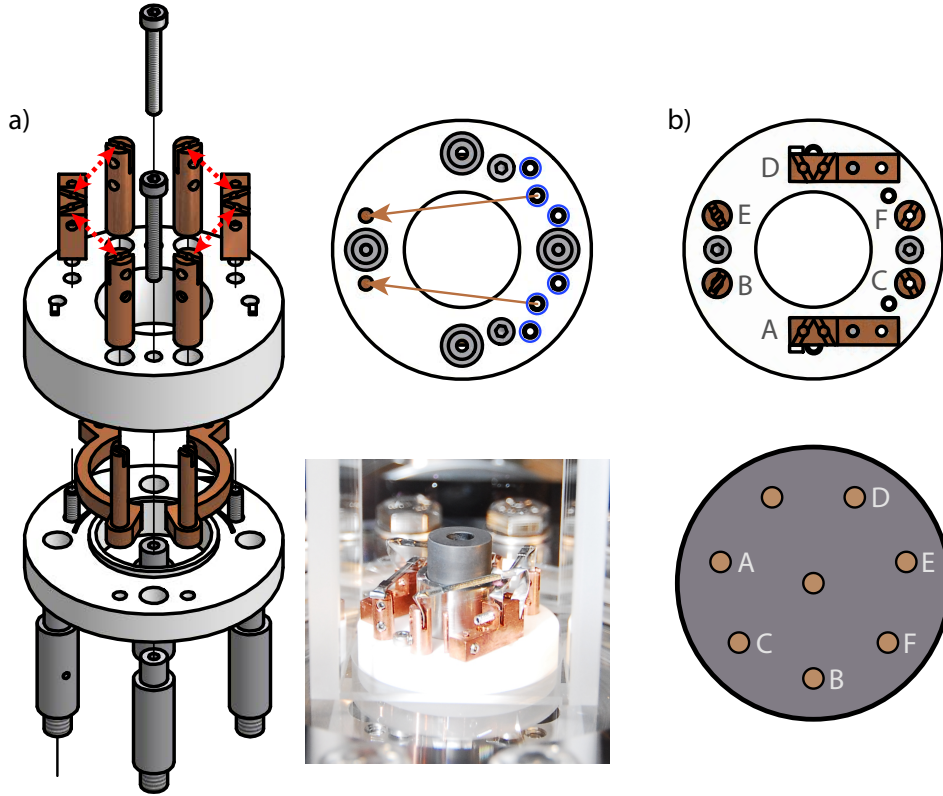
a) CAD drawing of the dispenser mount assembly. Visible is the two part design. The red dashed arrows indicate the position of the dispensers. Middle: Sketch of the internal connections and a photo of the dispenser mount inside of the 2D MOT glass cell. The blue circles indicate the positions where the feedthrough cables are connected to the dispenser mount. The arrow indicates the internal connection. The horizontal bars in the image are the rubidium dispensers, the grey tube is the upper differential pumping tube. b) Connections of the dispenser mount to the power feedthrough (lower circle). The upper left and central pin are not connected.
